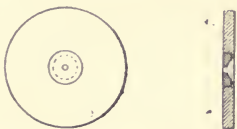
Circular Jewelled Draw-Plate for Cutting Parchmentised Thread.
